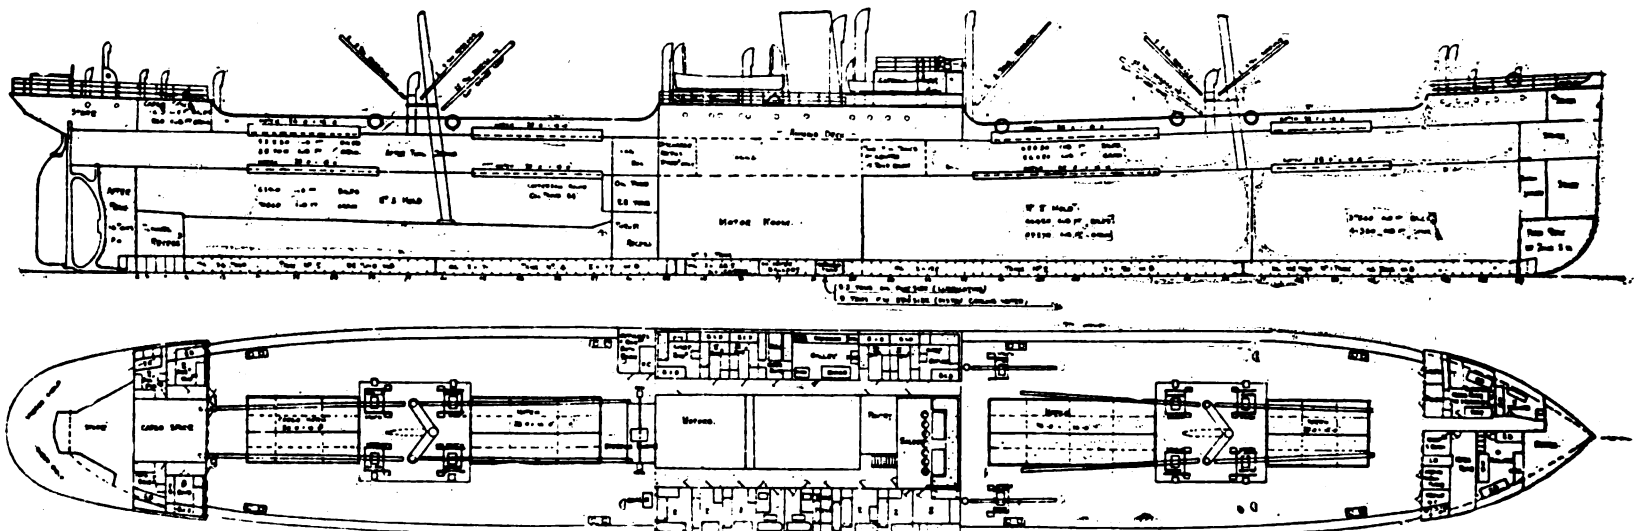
M.S. "Songvaar." Longitudinal section of hull showing small space now required for machinery and large cargo space
